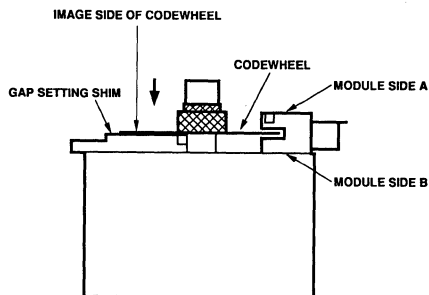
Alignment Tool is Used to Set Height of Codewheel.
